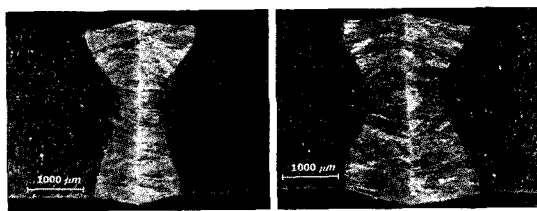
Photographs showing laser butt welding(P=1.6kW, v=1.0m/min, z=0.5mm)
